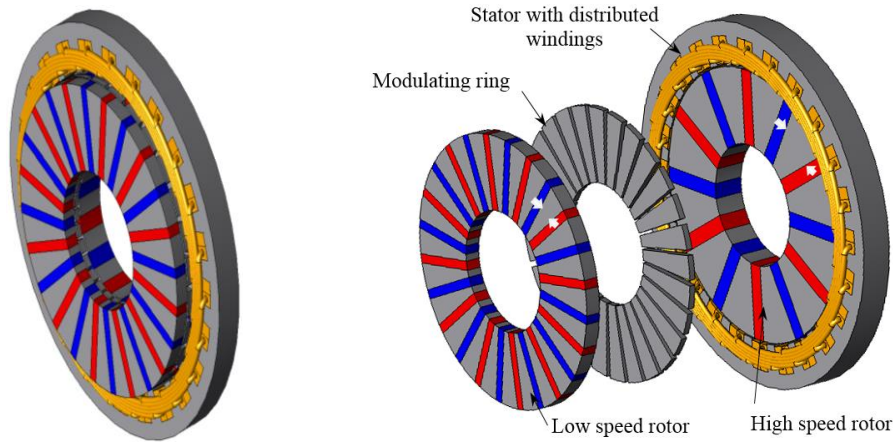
Magnetic geared machine presented in [KOU17].
